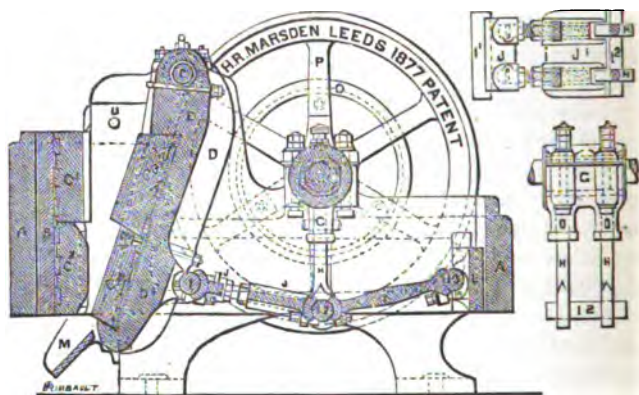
BLAKE'S STONE-BREAKING MACHINE.
